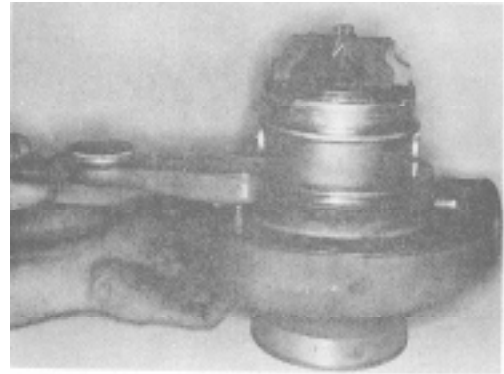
, T-543. Torquing oil seal/diffuser glate caoscrews in collector housing
